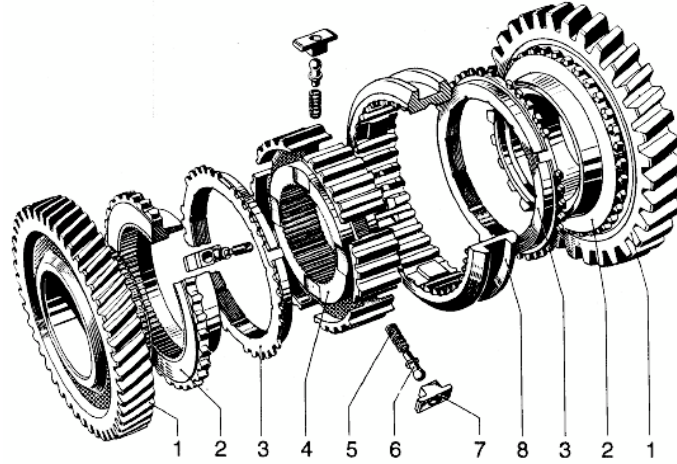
Exploded view of a synchronized gear-mesh, [20]
